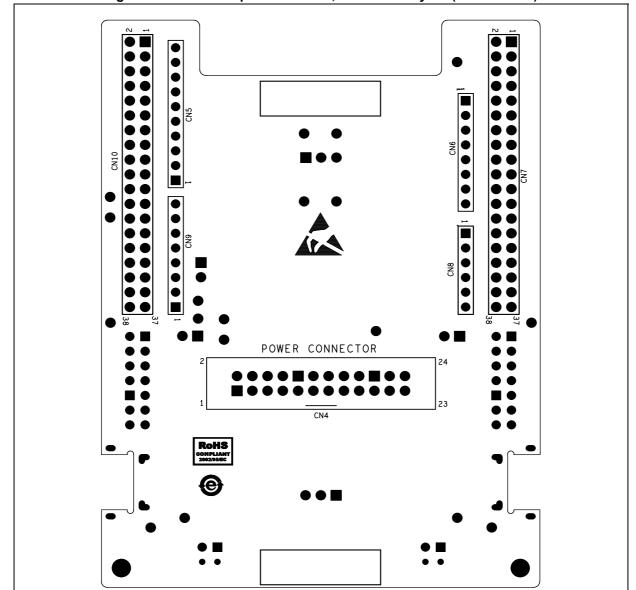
MB1257 expansion board, silkscreen layout (bottom view)
